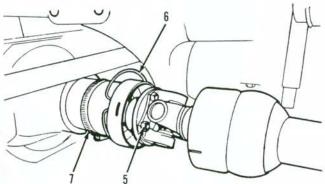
View showing both ends of drive shaft and shield. Front (axle) end of shield is retained by clip (6).
